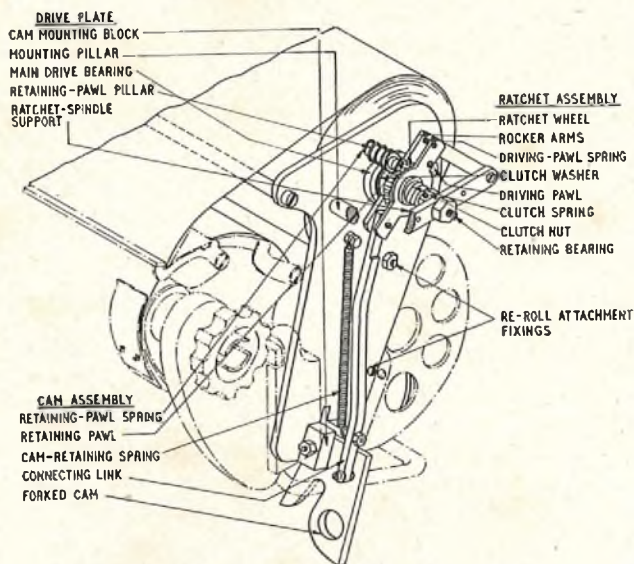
ISOMETRIC VIEW OF RE-ROLL ATTACHMENT
